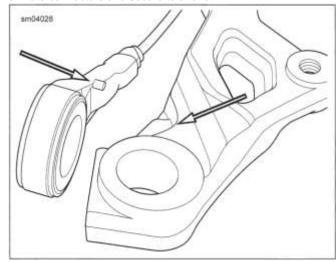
Rear Wheel Speed Sensor Index Pin
